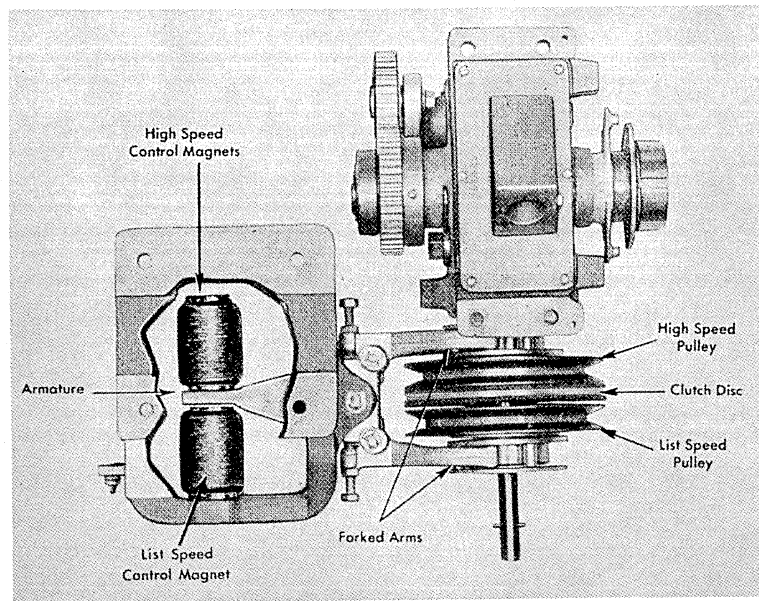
Two-Speed Magnets — Drive Housing and Clutch Assembly
